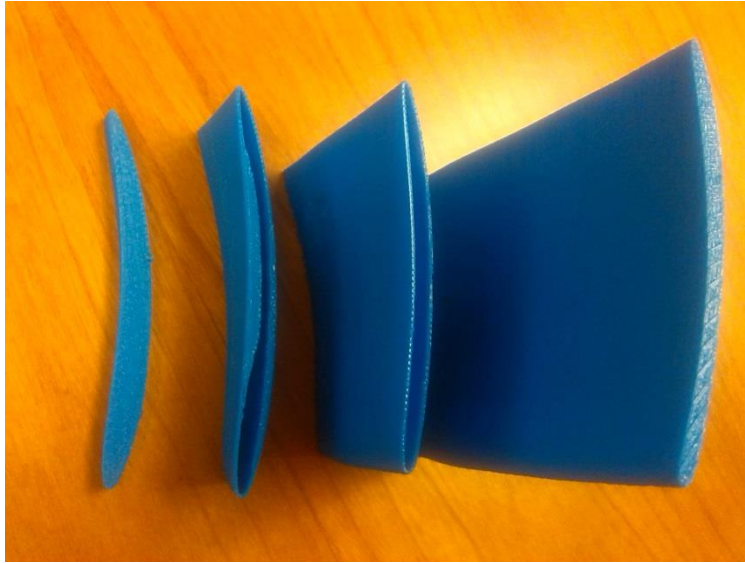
Topologically optimized hollow blade printed using 3D printer.
